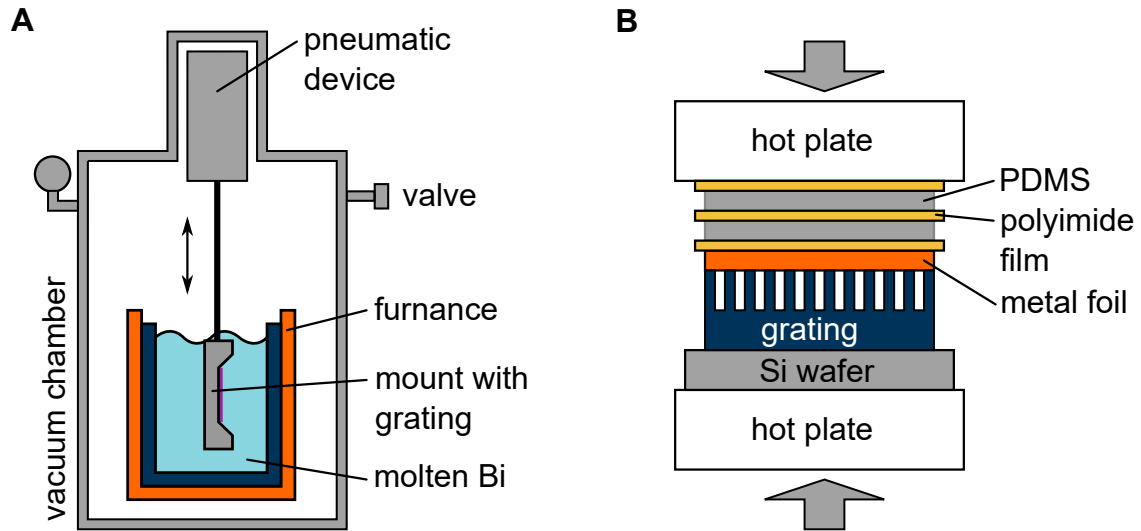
(A) Micro-casting setup consisting of a vacuum chamber with a furnace to melt the metal and an insertion device with the grating mount. (B) Hot embossing setup consisting of two hot plate stamps, the grating template, the metal foil, and several films to stabilize the process.
